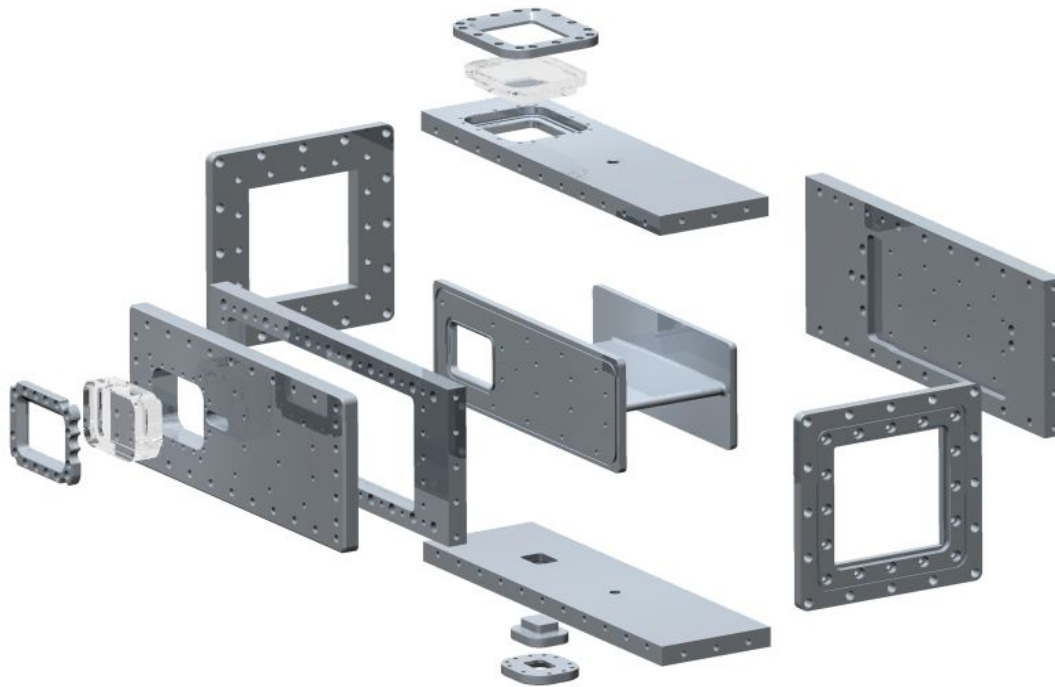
Exploded view of main parts of the test section. Notice that the hydrofoil and its sidewalls are a unified unit. Adapted from [91].
